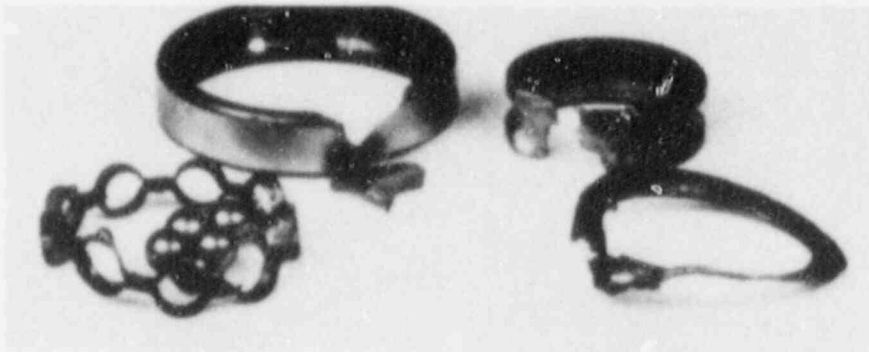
Pulley end bearing after being removed because of noise (bearing came apart during disassembly).
